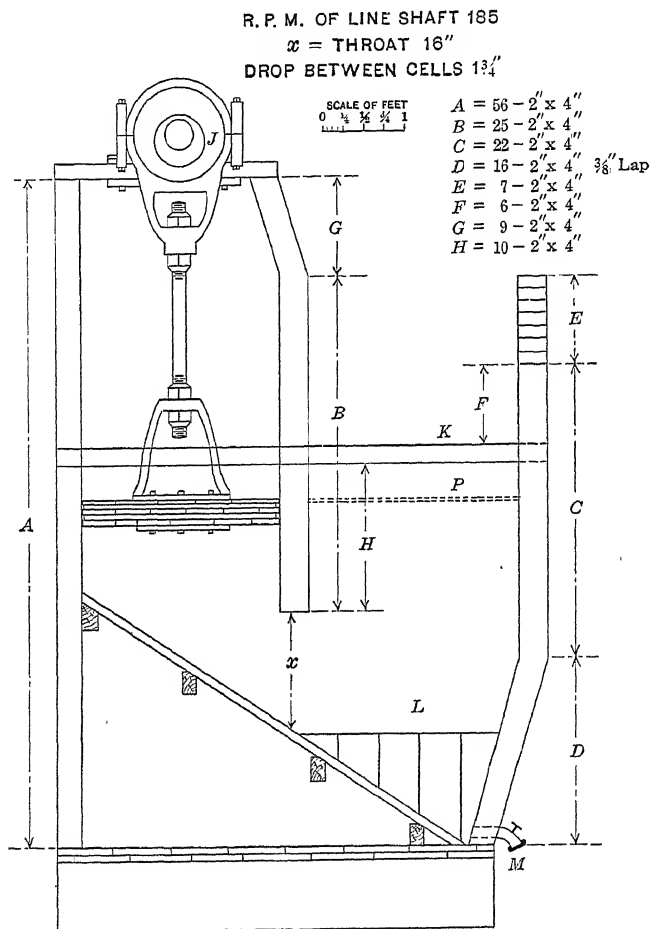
CROSS-SECTION OF 7-CELL JIG.
